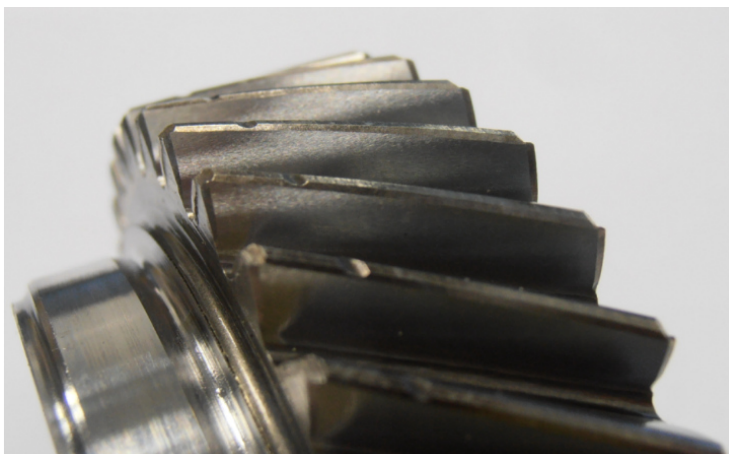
Final ground gearing and preparation for the synchronizing welding (3rd speed).
